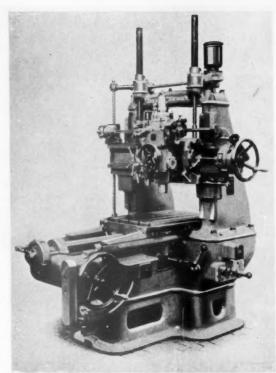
More rigid machine of the 1934 period, with motorised elevating of crossbeam and table rapid traverse.
